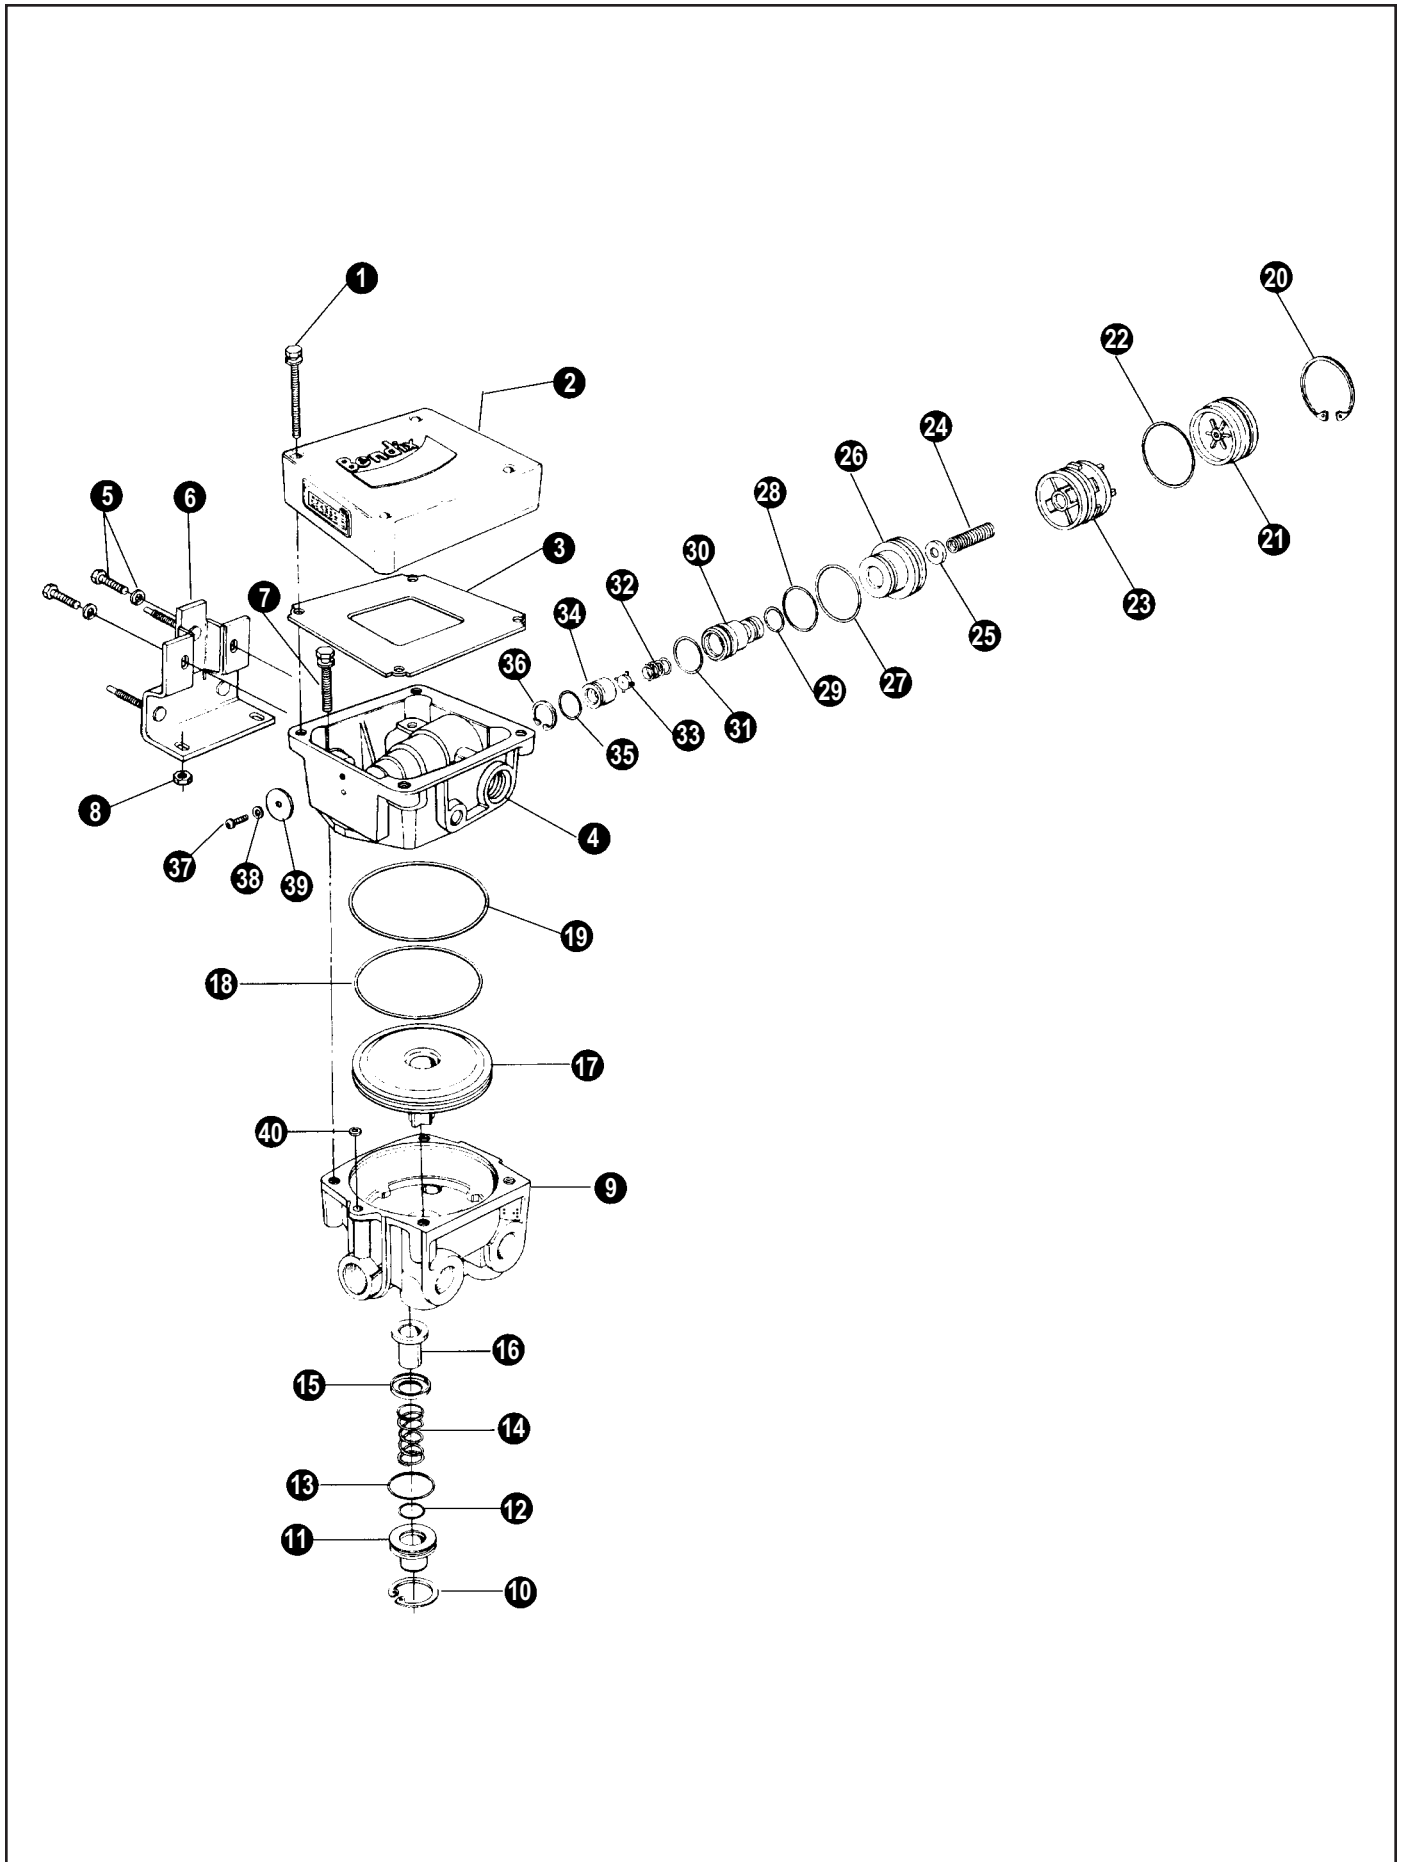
BENDIX® AR-2™ ANTILOCK RELAY VALVE
